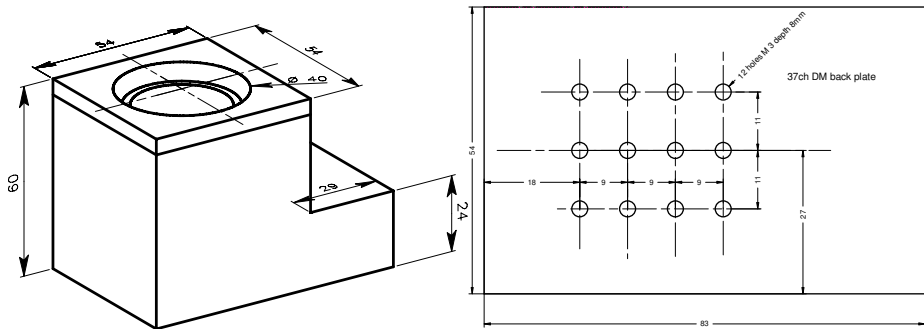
Technical drawing of the package and mounting holes of the 30mm 37-channel PDM
